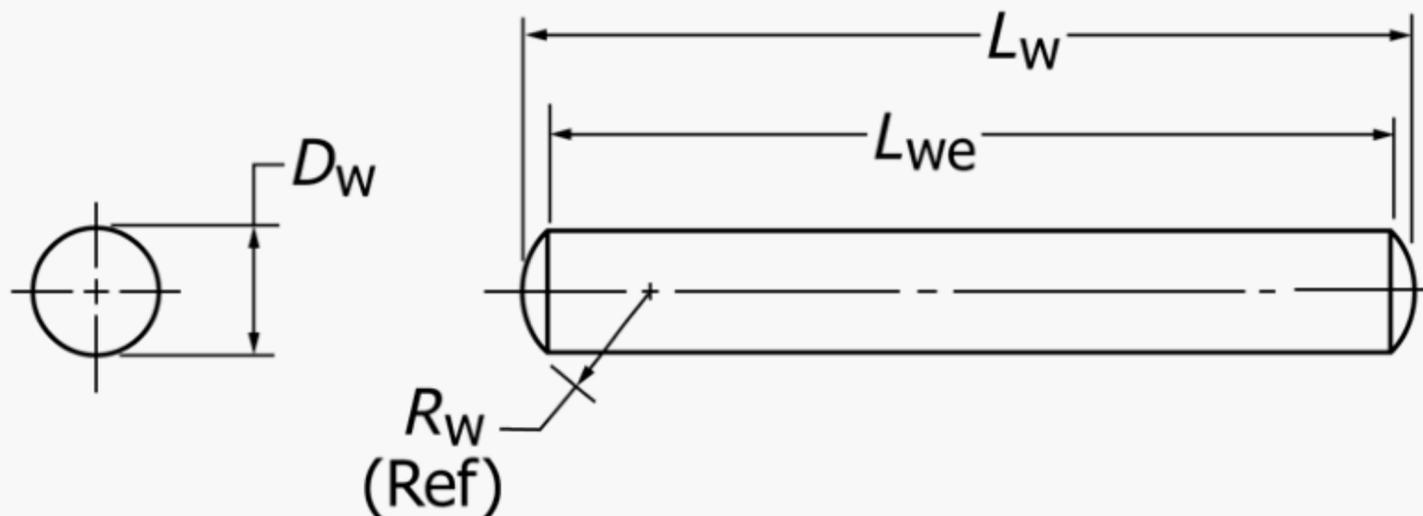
Schematic Drawing—Needle Roller with Spherical End
